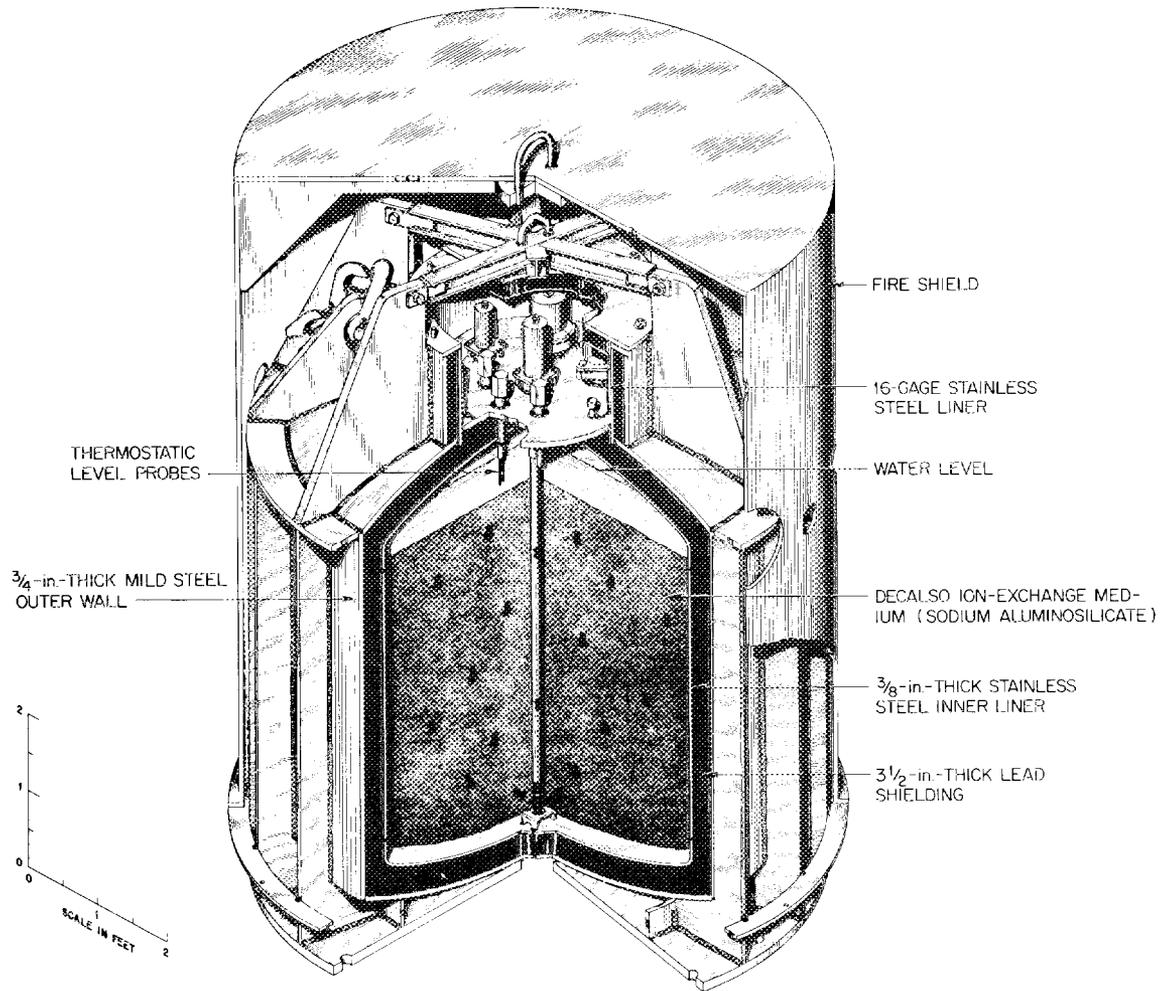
Cutaway Drawing of Shielded Transfer Tank, Model II (loaded weight 38,800 lb).
